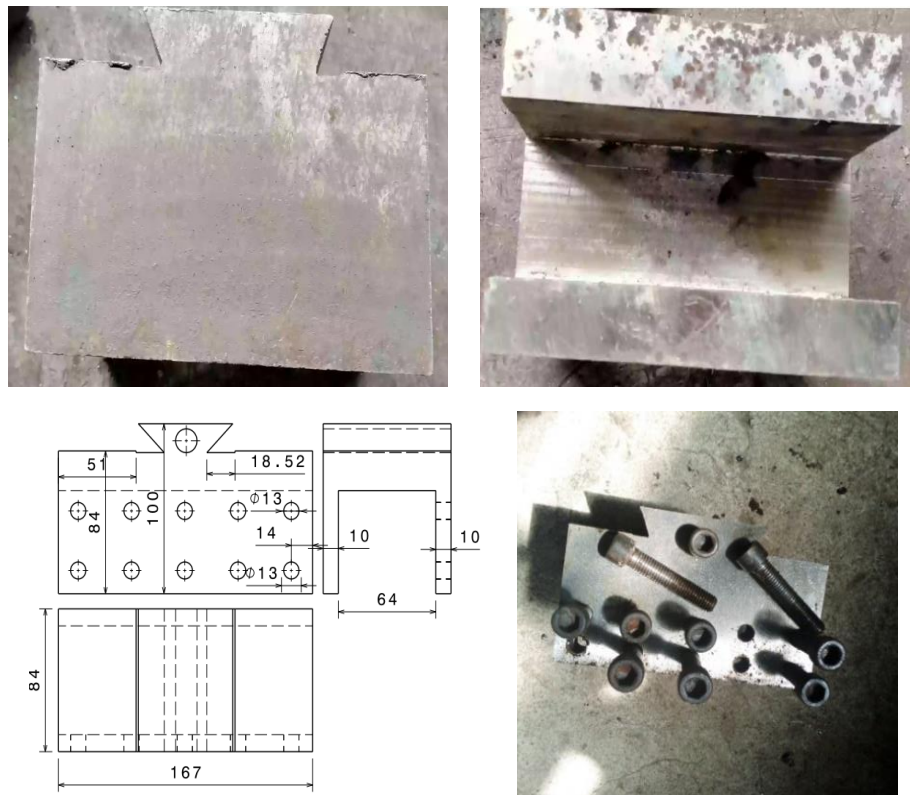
Photo of the tool fixture and detailed schematic of the tool fixture
